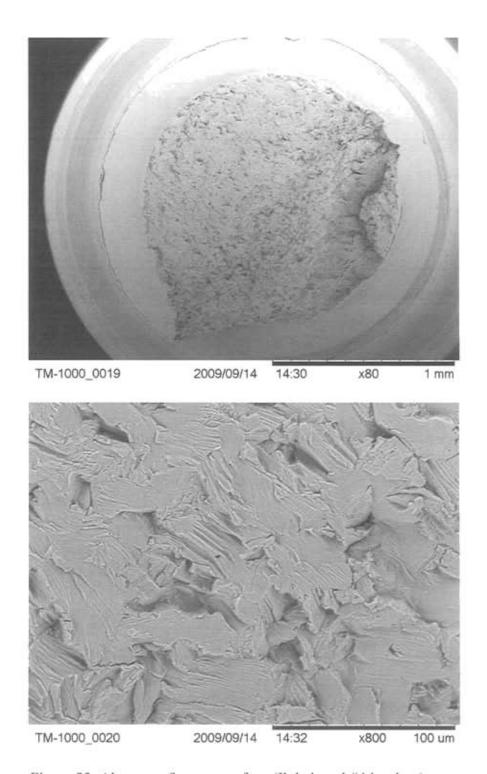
Abutment fracture surface (Ihdedental #4 implant).
